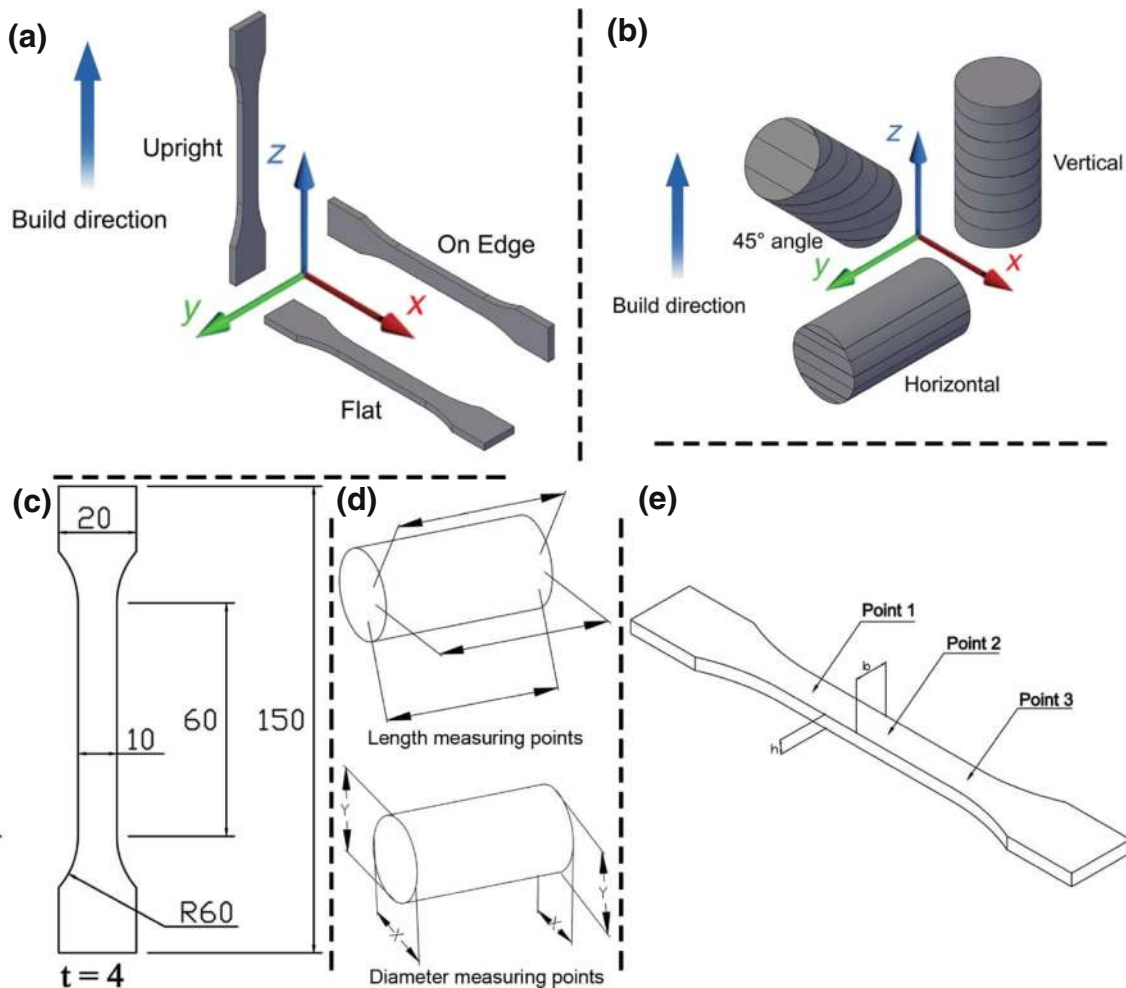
a Print orientations of tensile test specimens; b print orientations of tribology test specimens; c dimensions of the used dog-bone tensile test piece; d length and diameter measurement points for the cylindrical
